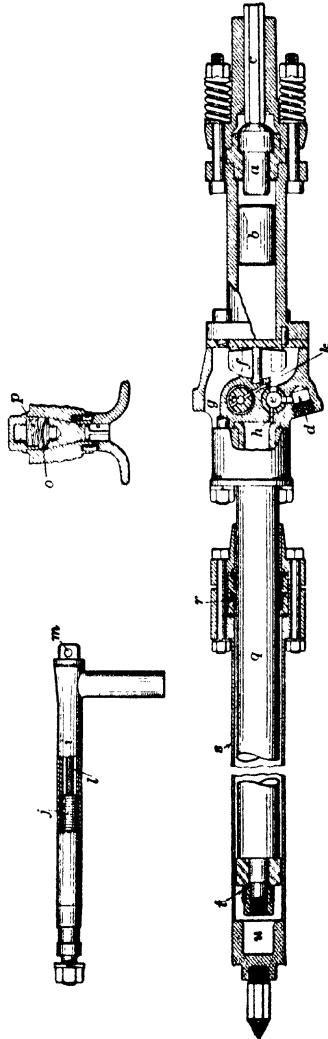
Ingersoll-Rand "Butterfly" Stoper.
